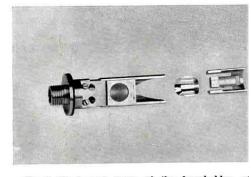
Component parts of the lampholder, at the right below the cylindrical mirror and mirror holder.
